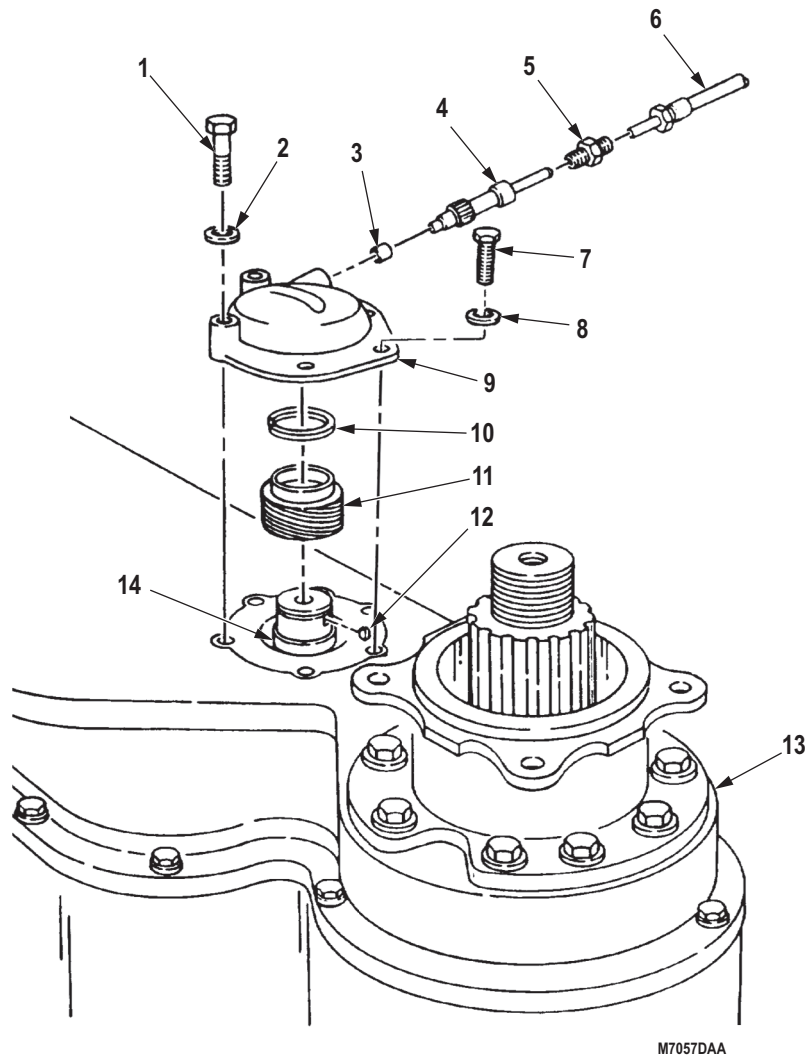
Transfer Case Speedometer Drive Gear and Driven Shaft Removal.
